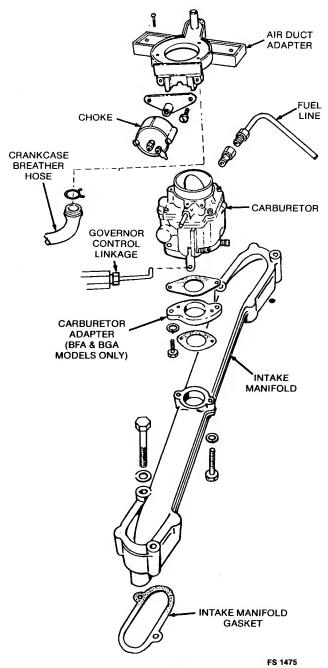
INTAKE MANIFOLD ASSEMBLY
